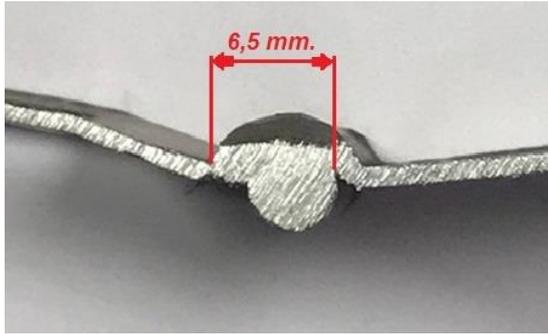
Cross-section through the hole weld which fasten lamella to the axis of rotation, after plastic deformation initiating the breaking process.
